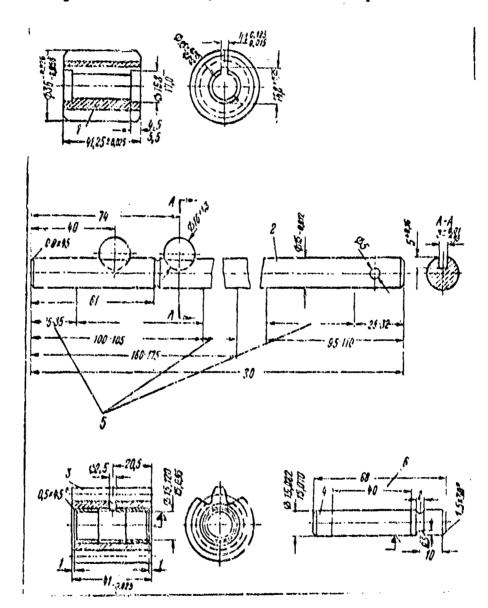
Dimensions of oil pump parts: 1) driven gear 2) drive shaft
